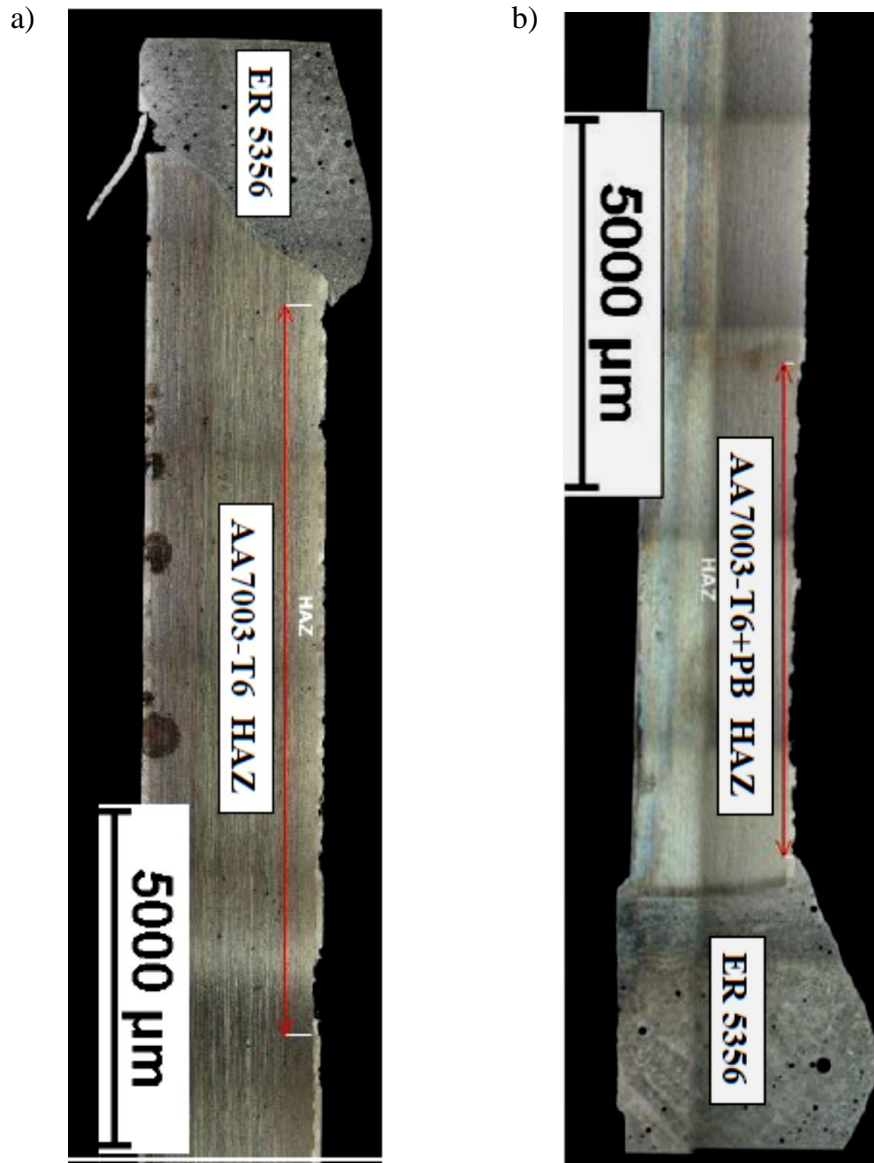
Large area scans of lap-joint welded configuration A (ER5356/AA7003/L) in the (a) as-welded T6 condition and (b) as-welded T6+PB condition post exposure to ASTM G85-A2.
